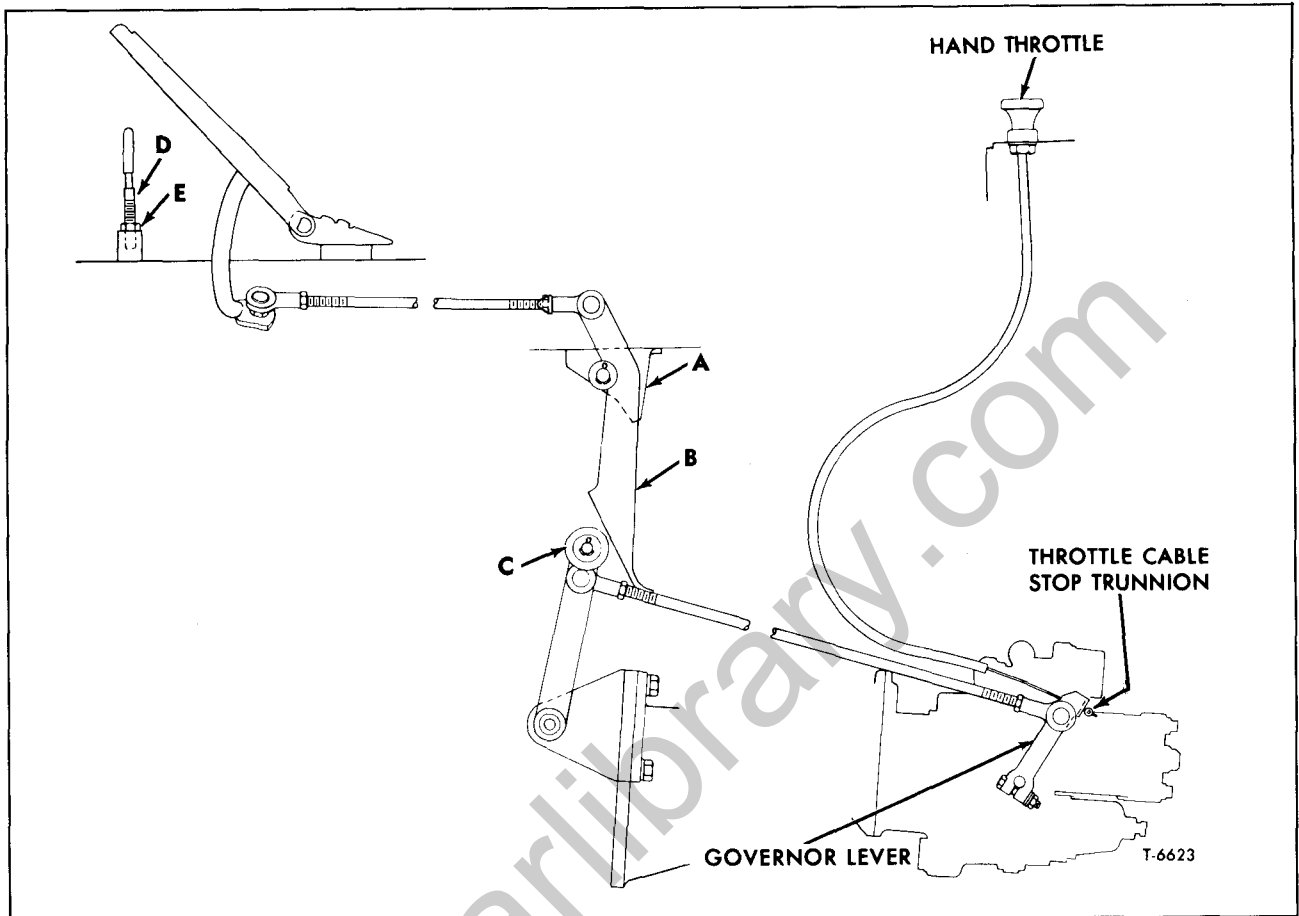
Tilt Cab Accelerator and Throttle Linkage
